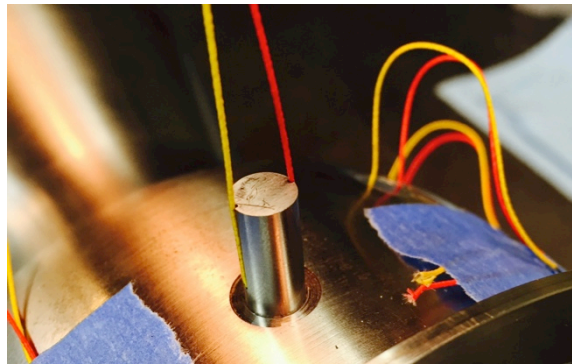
Thermocouple plug prior to installation into the nozzle body.
